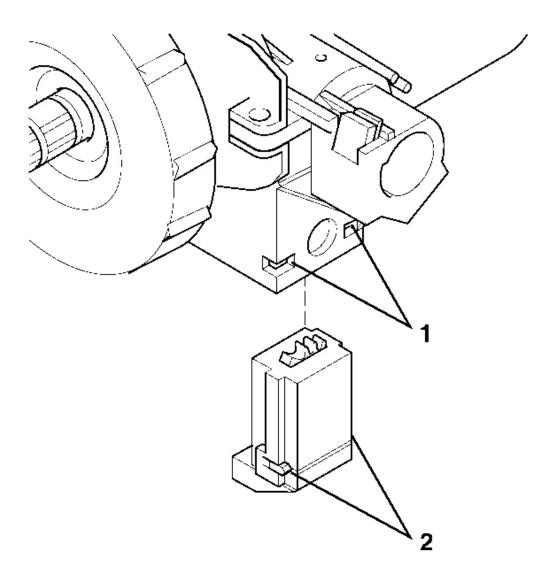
Inserting Ignition Switch Into The Lock Cylinder Housing Courtesy of GENERAL MOTORS CORP.
